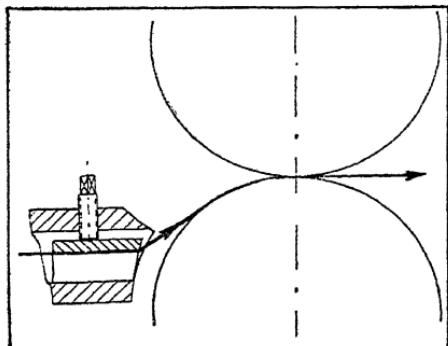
Type of Hook Guide Which Prevents the Piece from Turning in the Pass
